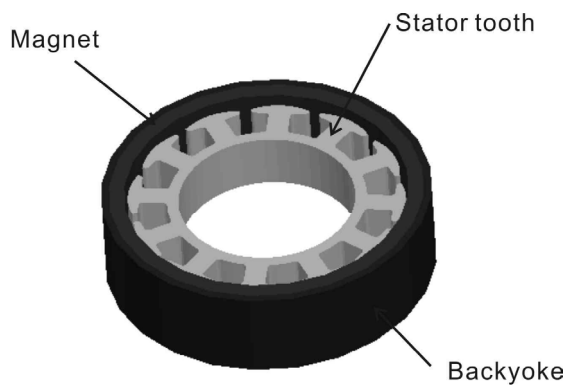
The stator teeth and the ring-type magnet and backyoke rotor of the spindle motor
